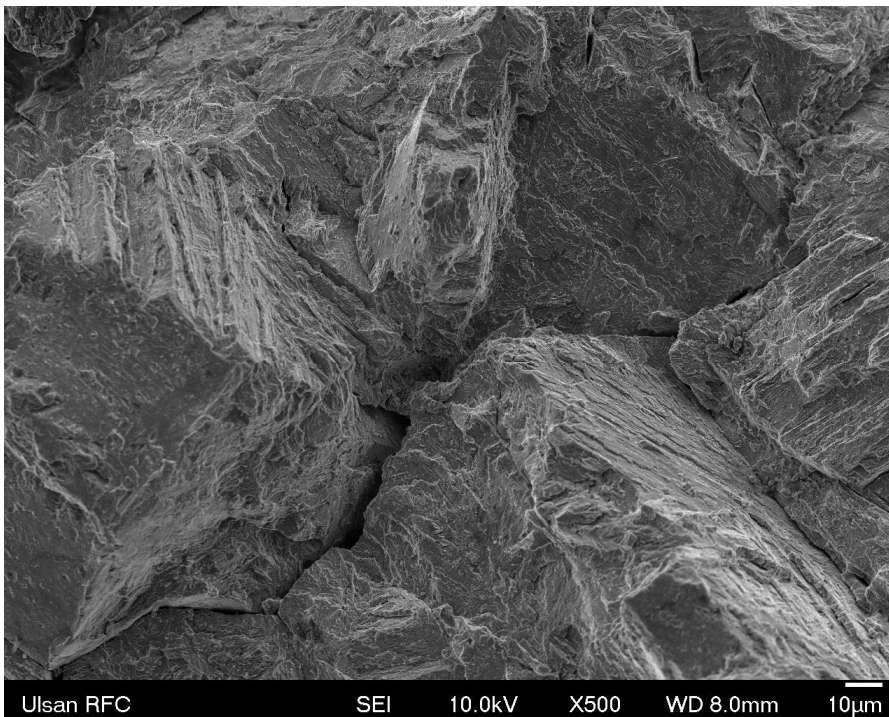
Fractographs of Y-groove specimens fractured at CE-37H specimen
